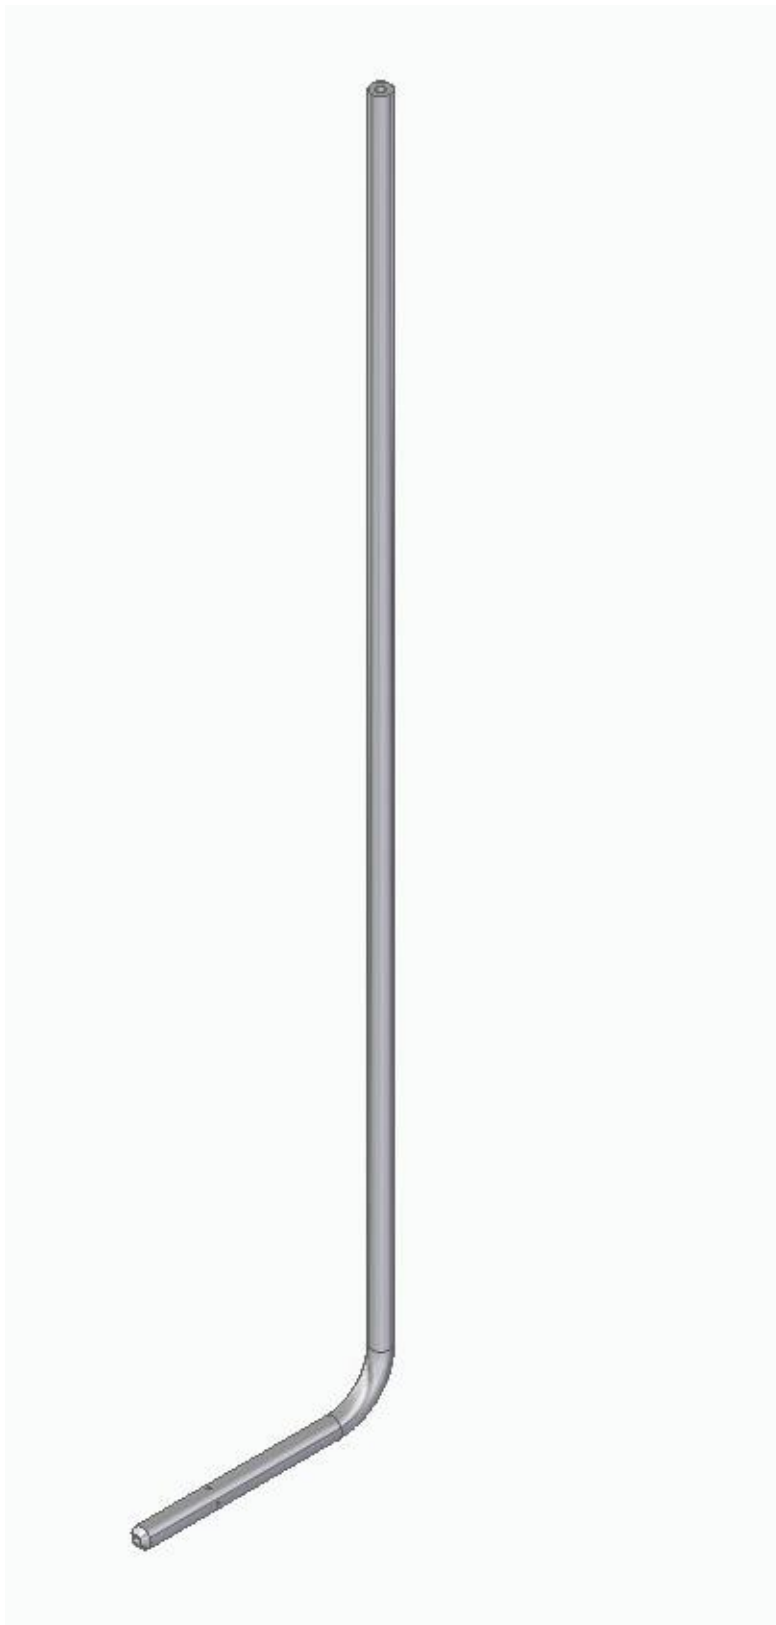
Three-dimensional isometric view of the PCB-6-KL pitot static probe.
